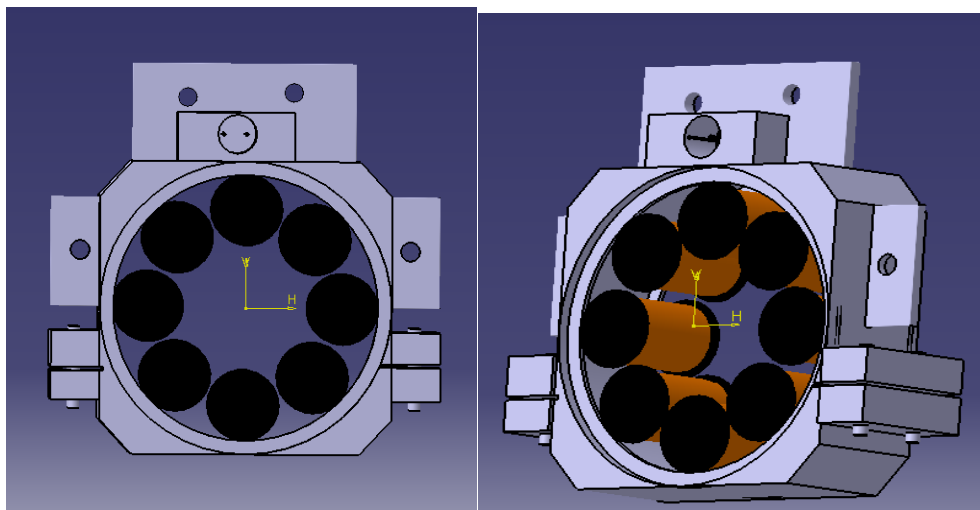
CATIA model of magnetic brake housing and winding coils
